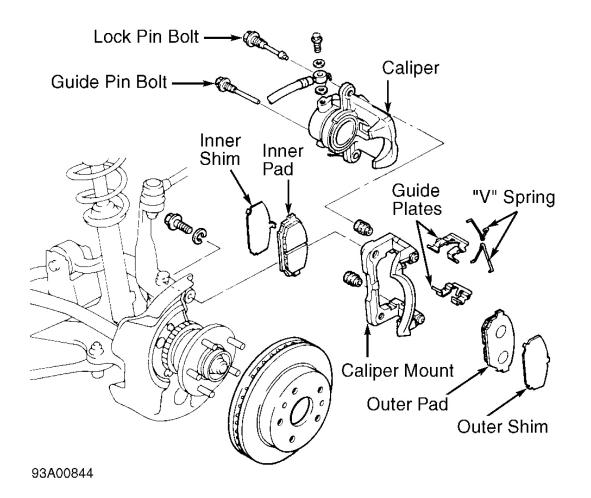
Exploded View Of Front Disc Brake Assembly (929 Shown; Millenia Is Similar) Courtesy of MAZDA MOTORS CORP.
